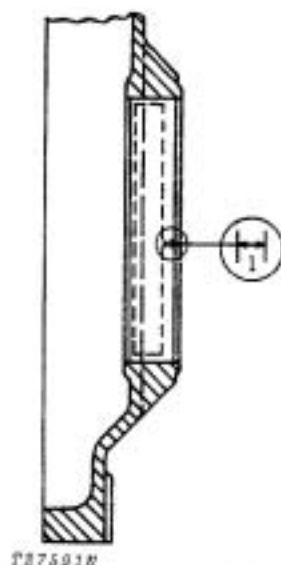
Front Oil Seal Installed in Timing Gear Cover
